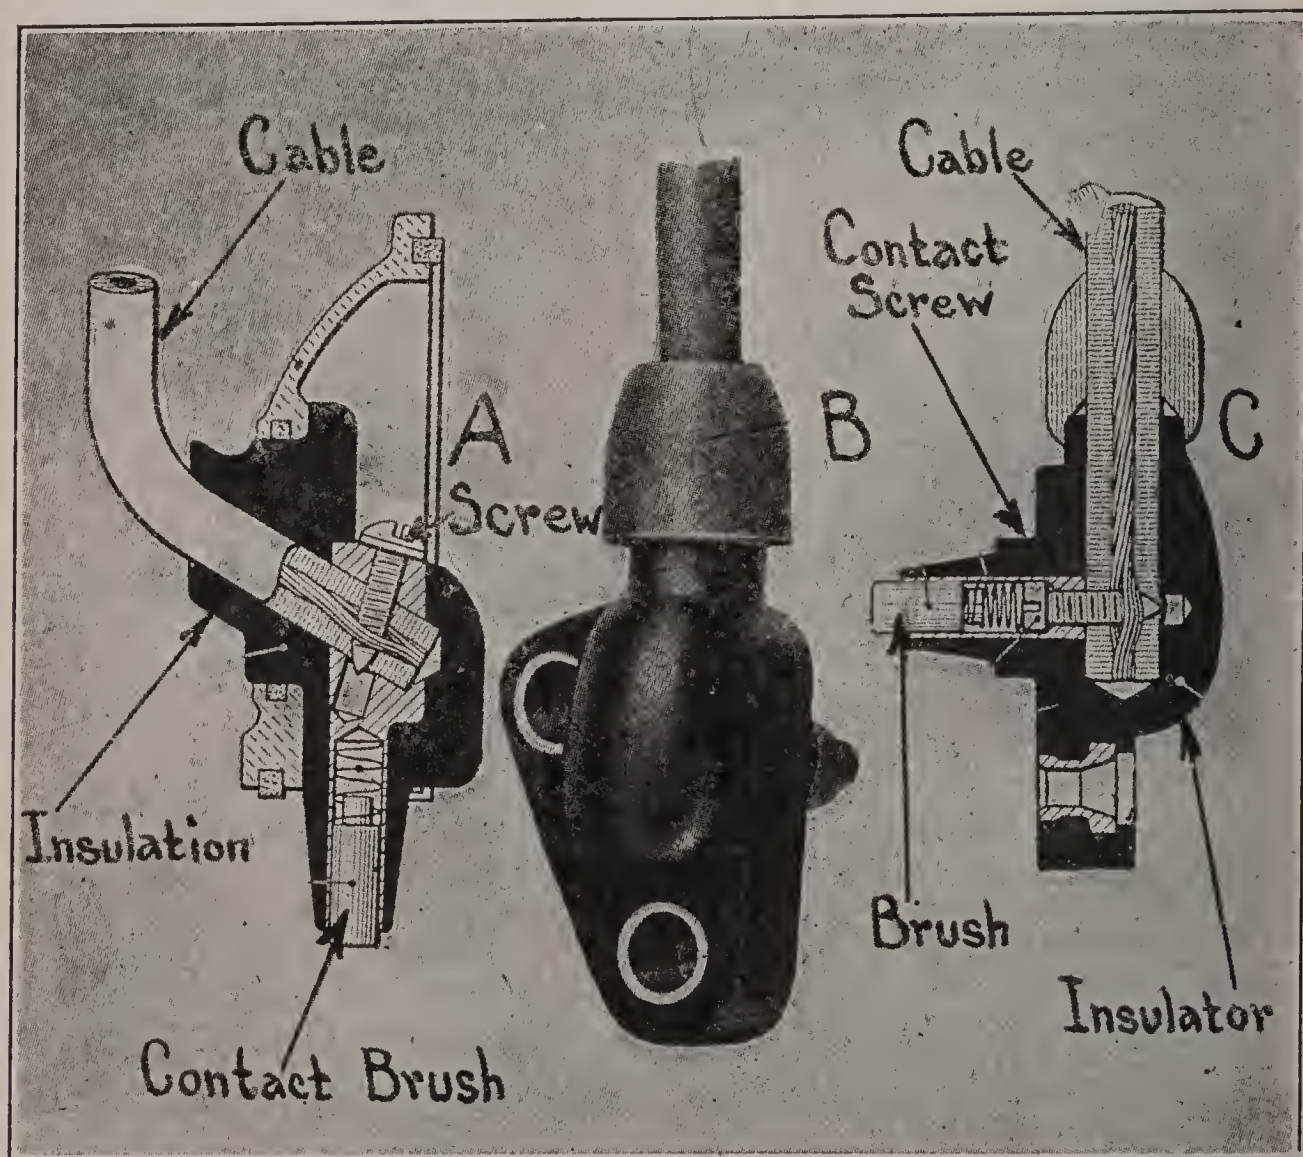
Carbon Brush Holders Used in Bosch Magneto, Showing Methods of Making Connections With Secondary Cable.
